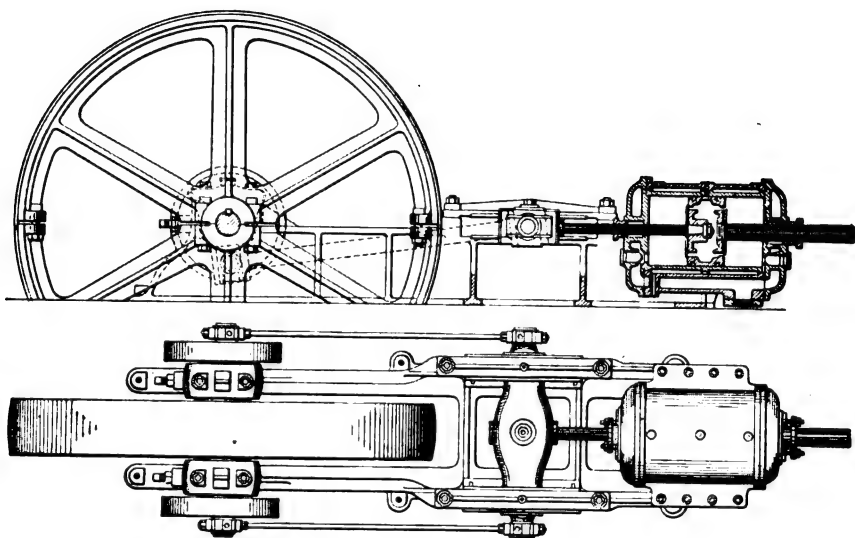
Ingersoll-Rand Straight-Line, Belt-Driven Compressor.
